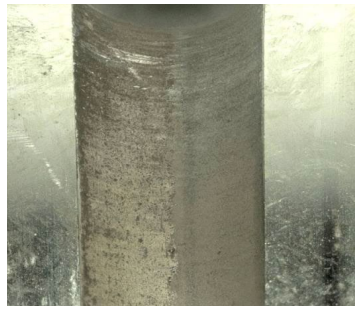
Photo of inlet, outboard bearing (from Set2) showing inner ring raceway after 60 drops.
